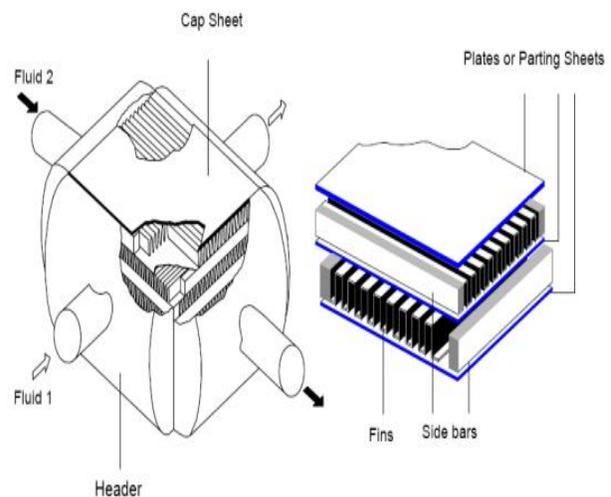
Plate fin heat exchanger assembly and details Side bars Plates or Parting Sheets Fins Fluid 1 Fluid 2 Cap Sheet Header
